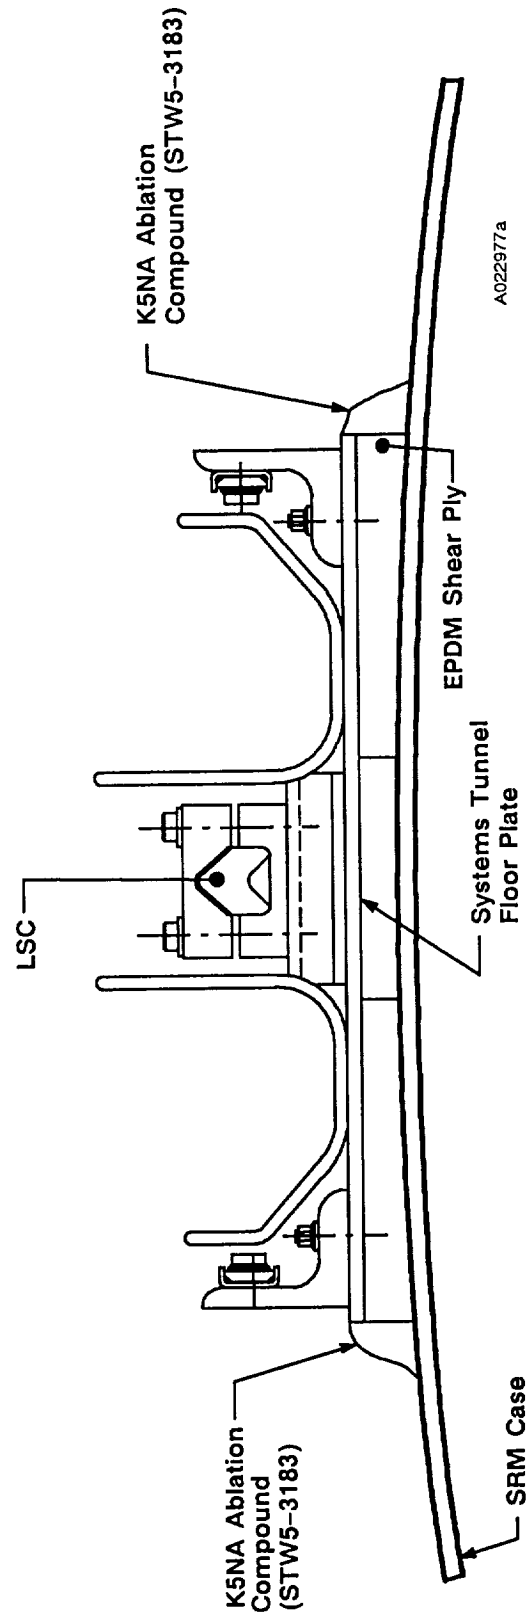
Cross Section of Systems Tunnel LSC Test Article (systems tunnel covers not installed)
